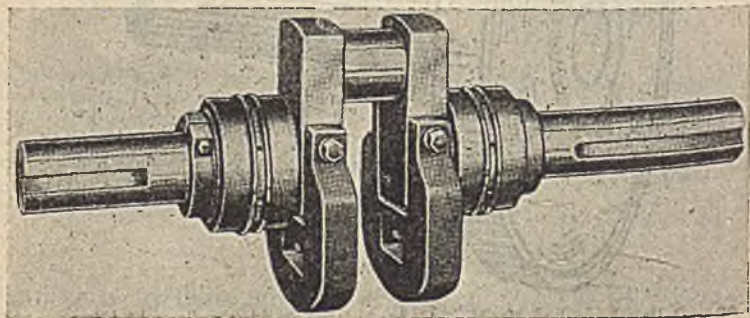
Built up crank shaft. The crank pin is carried by a disc which is counter-balanced. Hydraulic pressure is used to force the pin and shaft in place.
